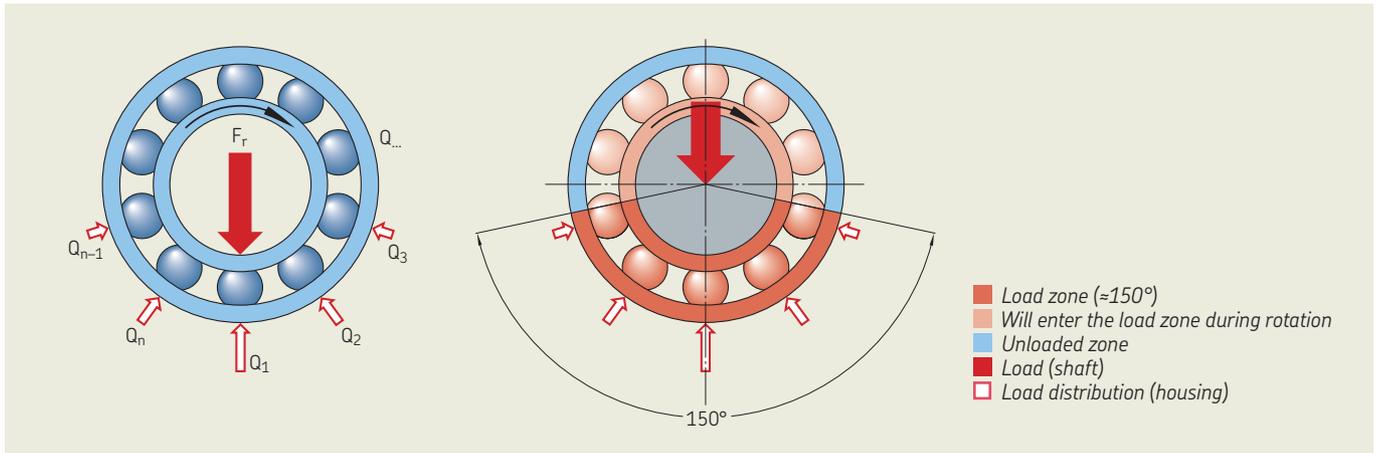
When the bearing is loaded with external load F_r , bearing load F_r will be transferred from the inner ring to the outer ring via rollers. The external load will be distributed to rollers. Each roller has an individual roller load (Q_n), which is perpendicular to the contact surface. Roller load distribution in the bearing shows how the loads are varied between bearing rollers.
